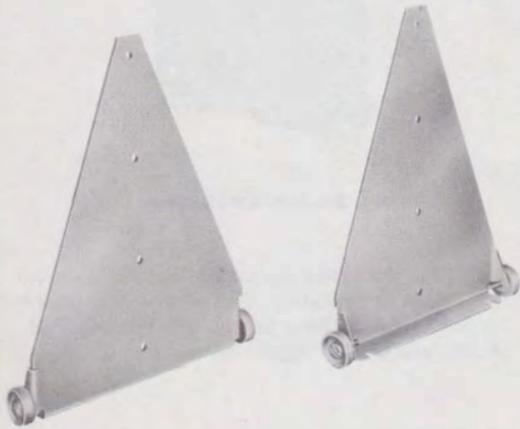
Bracket Assembly Per ED-69366-50, Group 2
